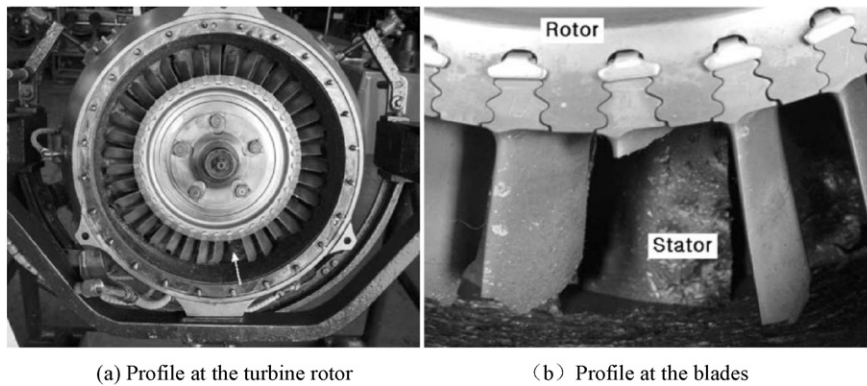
Rear view of a J69-T-25 turbojet engine turbine [88].
